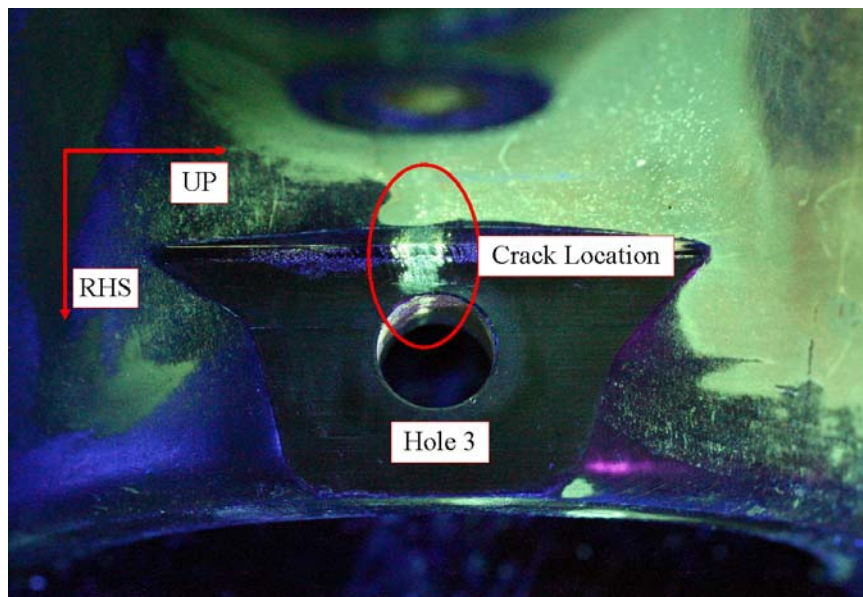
FPI Hole 3 Crack, Surface C (A/C N5274P)
